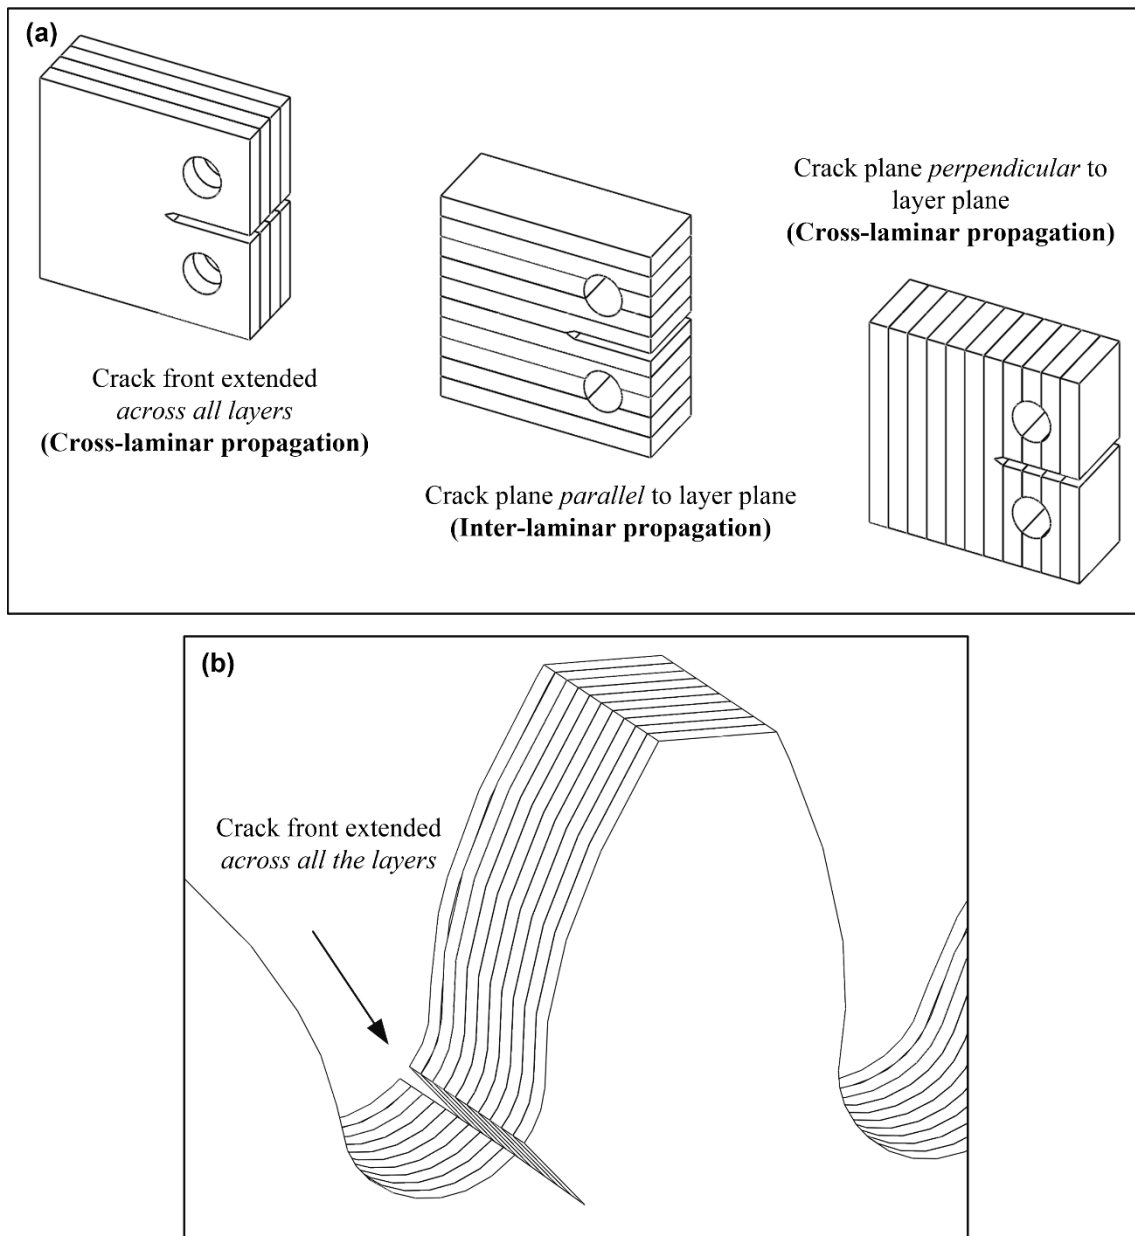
(a) The three standard build configurations of additively manufactured compact tension specimens and (b) Bending fatigue crack in selective laser sintered gear built in ‘flat’ configuration.
